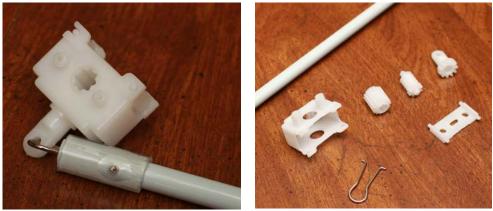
Unique parts in the cordless vertical blinds (assembled and disassembled)
